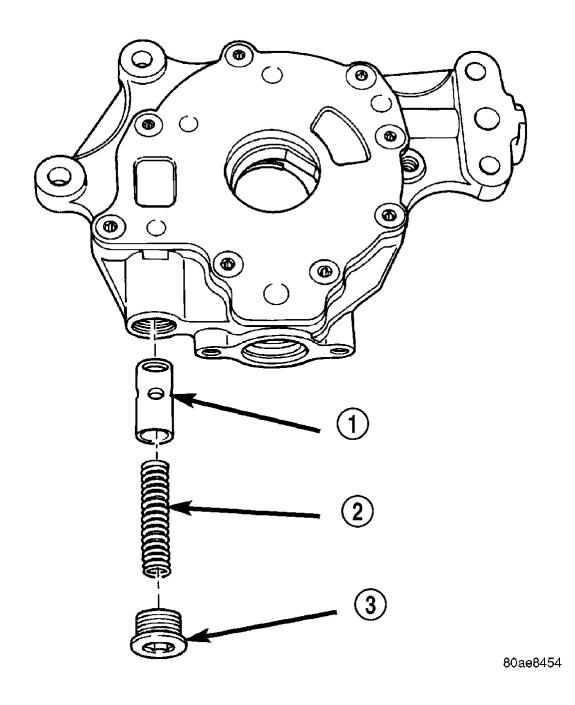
View Of Oil Pressure Relief Valve Courtesy of CHRYSLER LLC
